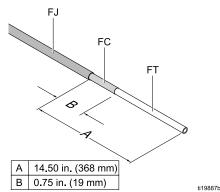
Shielded Hose 24M732 Dimensions at WB100 Enclosure
